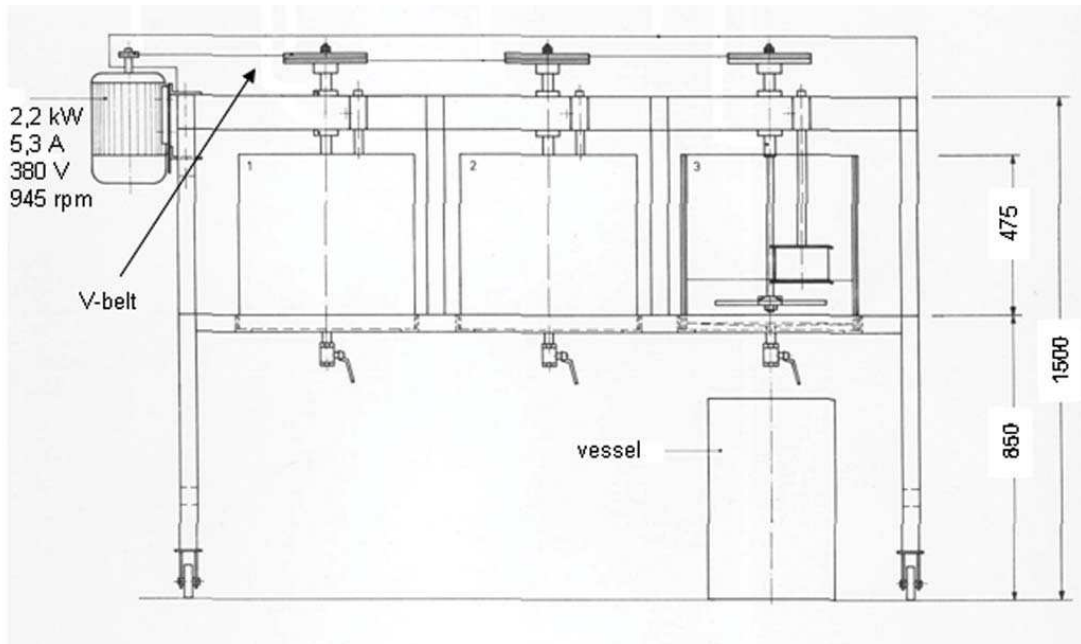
Drawing test apparatus with 3 test containers, lateral view.
